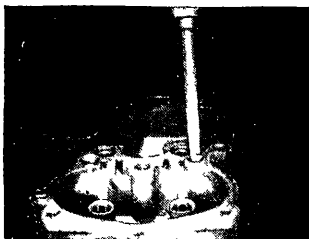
Remove both pump jet plugs and pump jets. All metering jets in these carburetors are in duplicate. Illustrations show removal of only one
